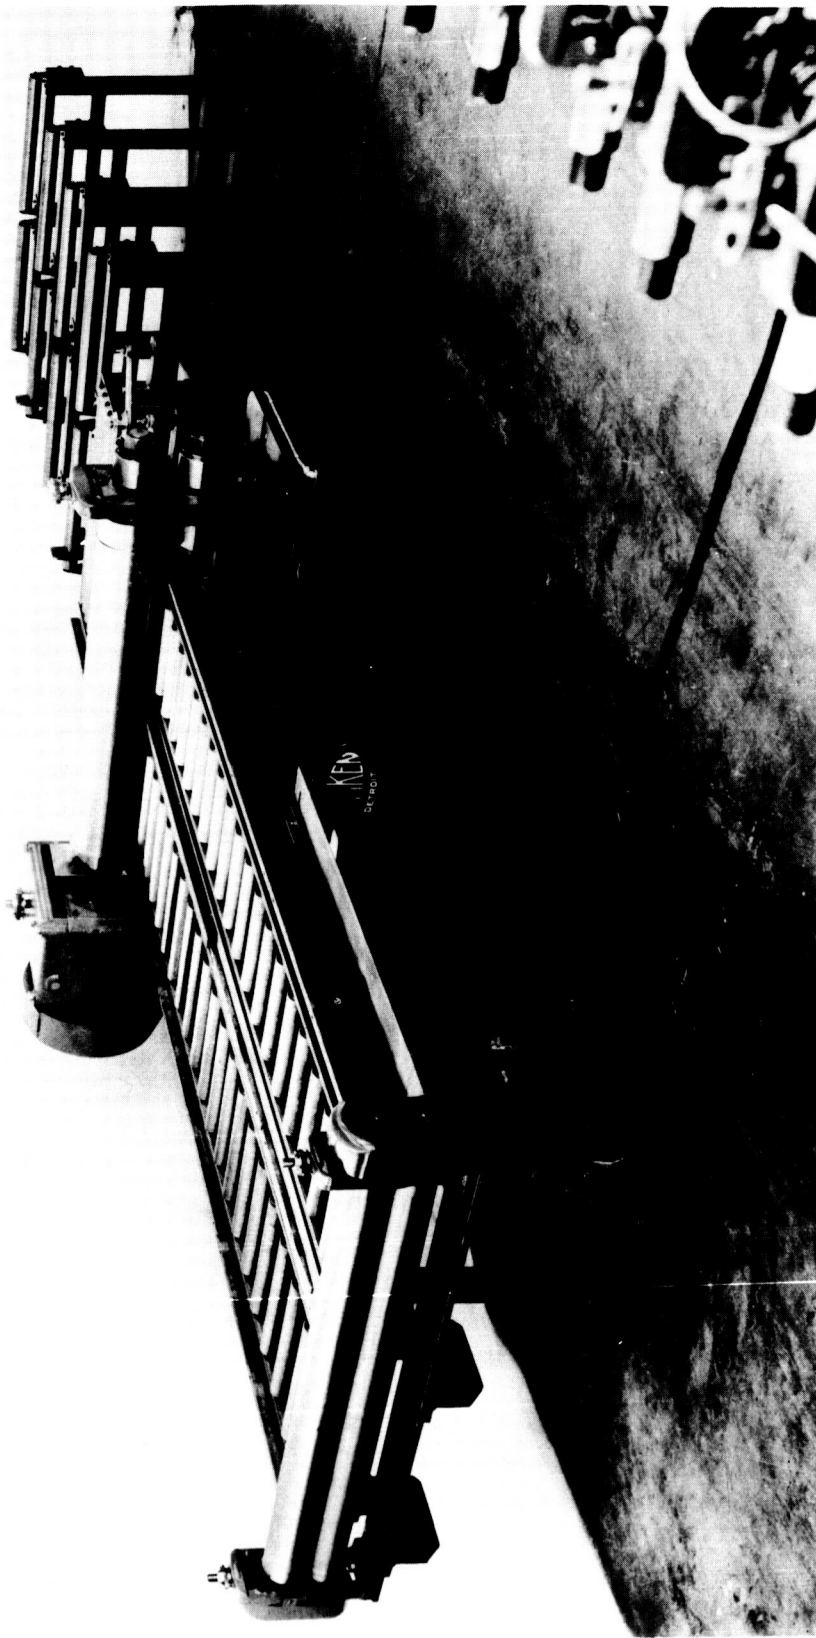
CUSTOM-BUILT SLITTER CAPABLE OF SLITTING SHEETS UP TO 60 INCHES WIDE
